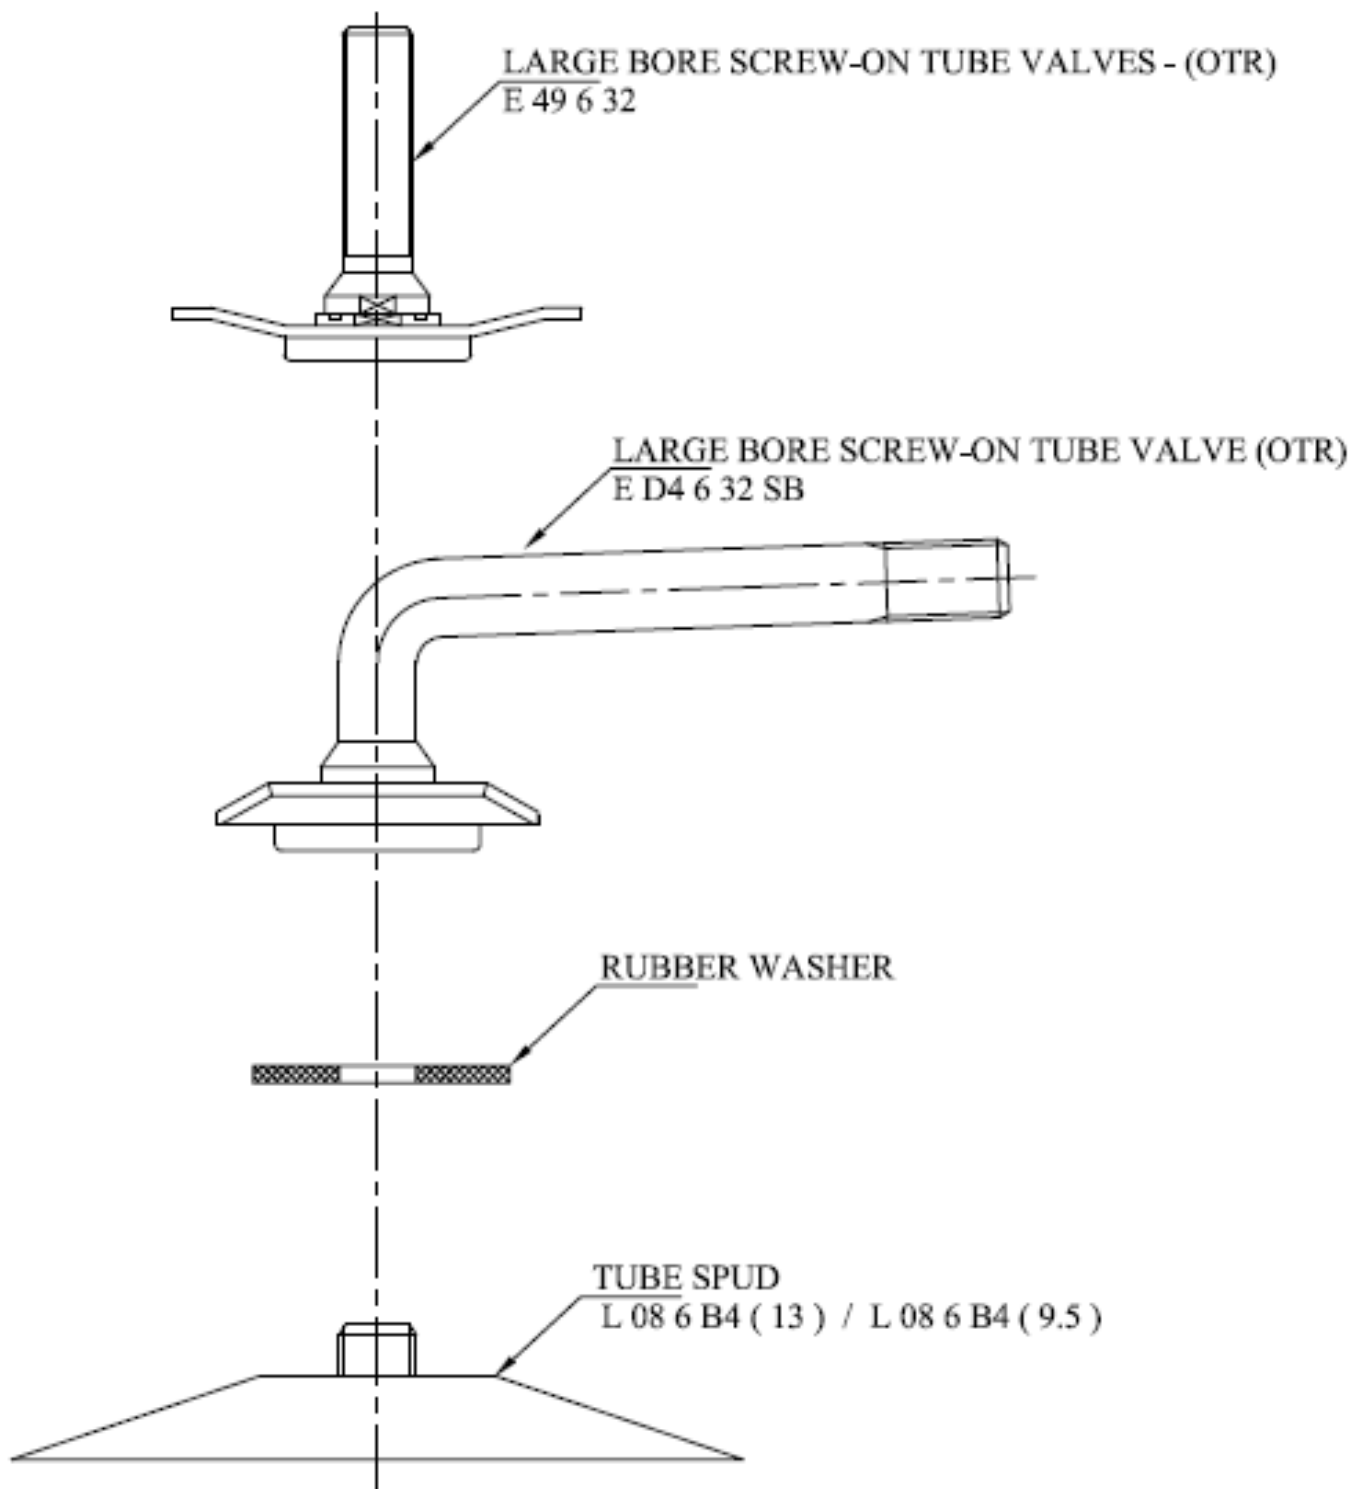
LARGE BORE SCREW-ON TUBE VALVES - (OTR) E 49 6 32
